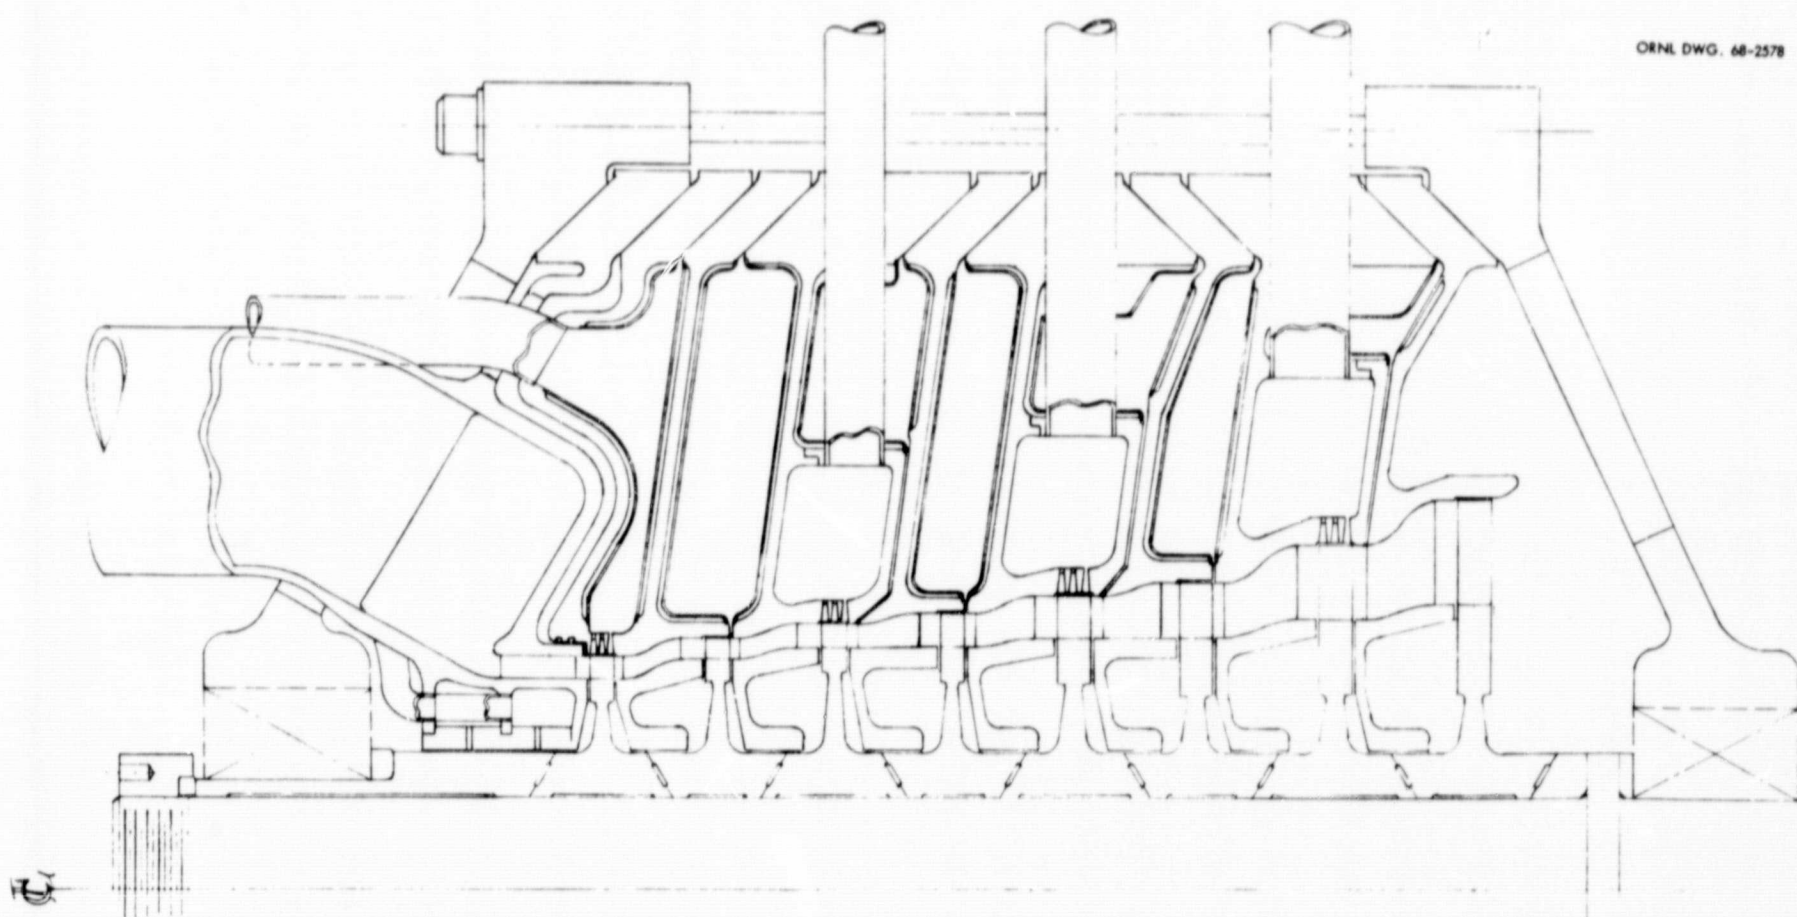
Reference Design Layout for the Eight-Stage, Four-Bearing Potassium Vapor Turbine.
